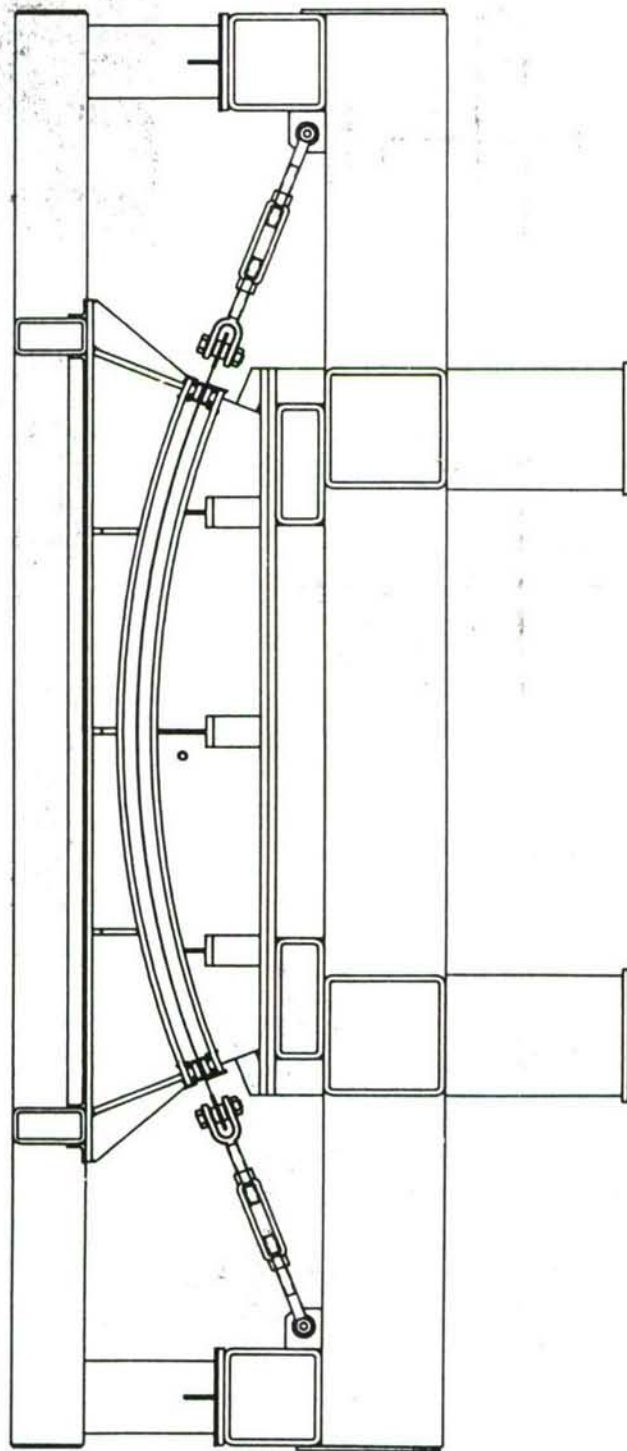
END-VIEW DETAILS OF TEST FIXTURE
